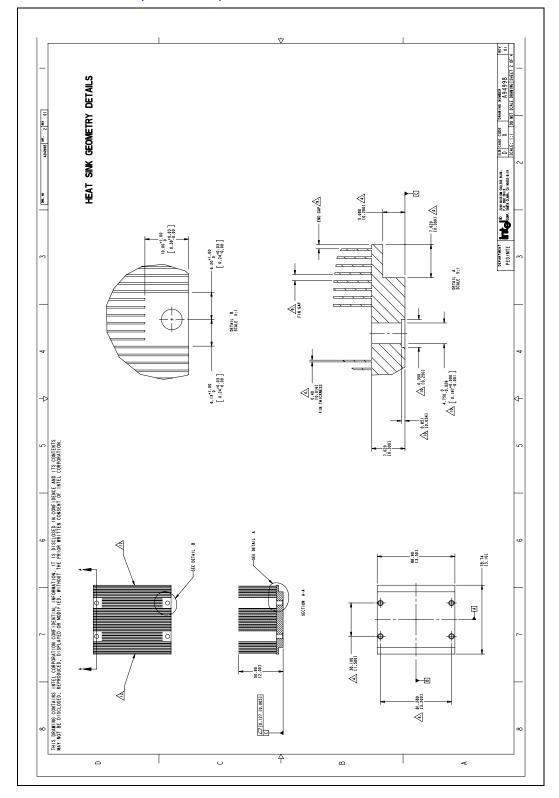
2U CEK Heatsink (Sheet 2 of 4)
